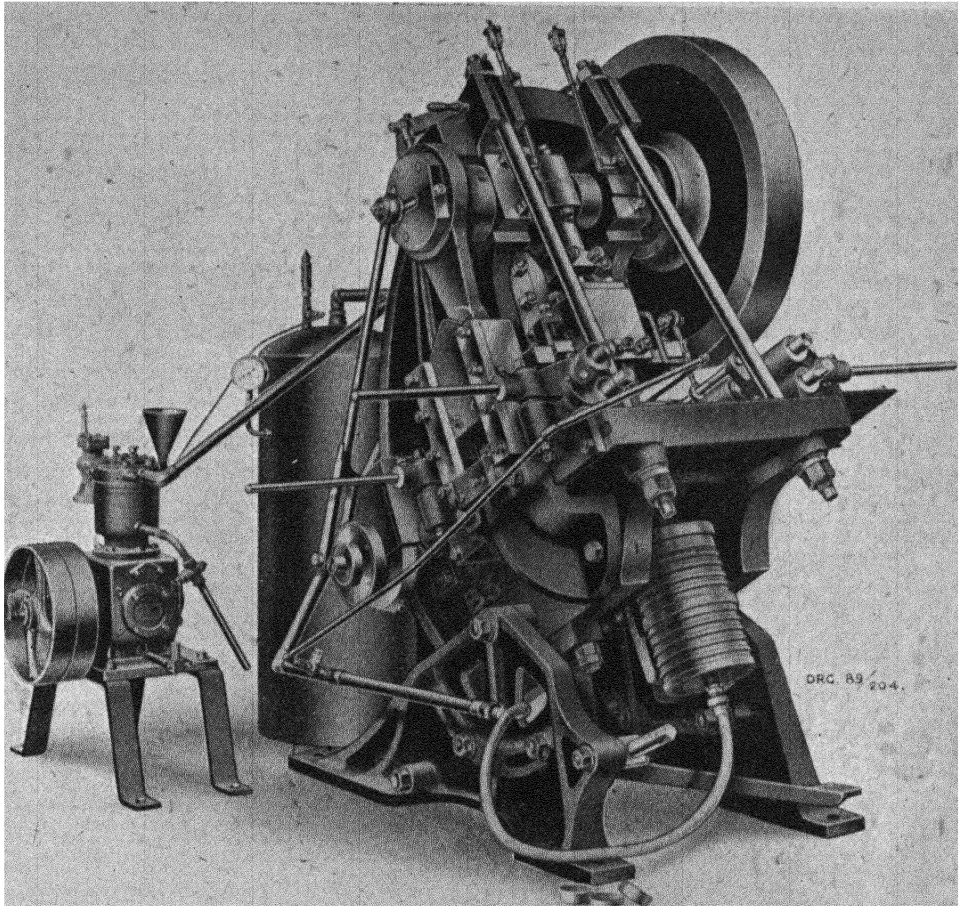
DOUBLE-ROLL FEED PRESS WITH BLOWER AND SCRAP-CUTTING ATTACHMENT
